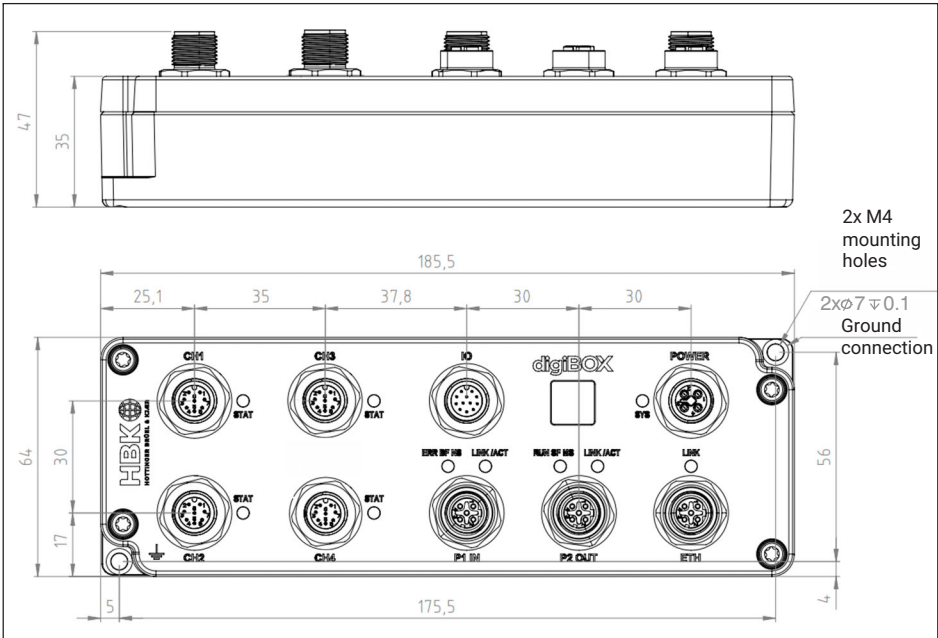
digiBOX Weighing technical drawing (configuration shown: K-DBX-4S-AD-IE-W-WLT)
